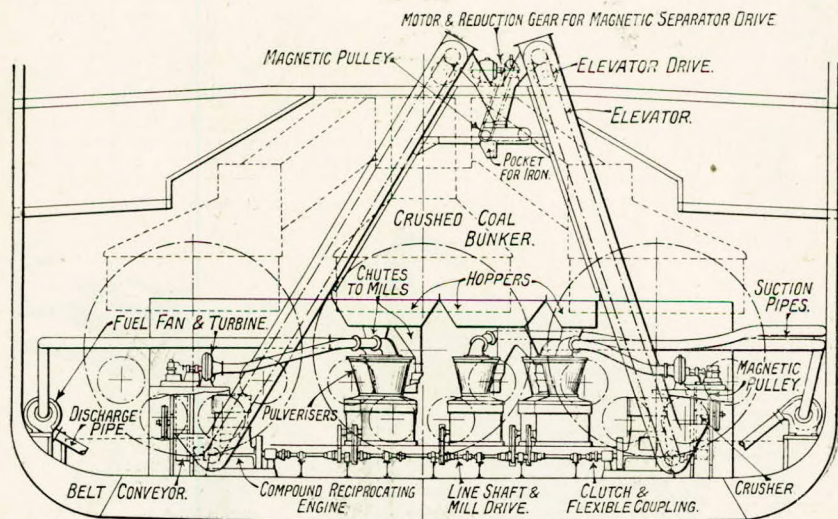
Pulverising and Coal Handling Plant looking Aft from Forward Bulkhead.
